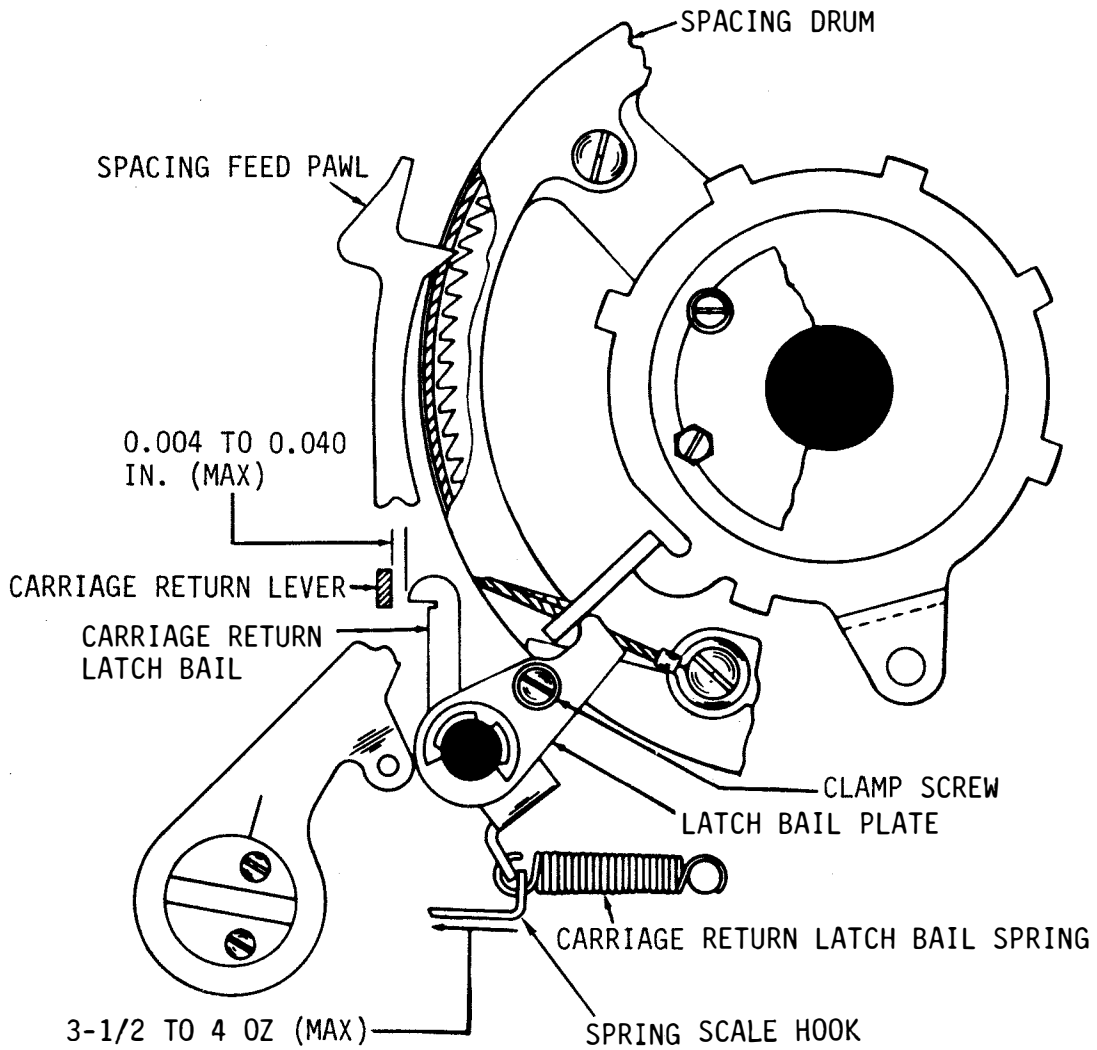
Carriage Return Latch Bail and Latch Bail Spring, Front View
